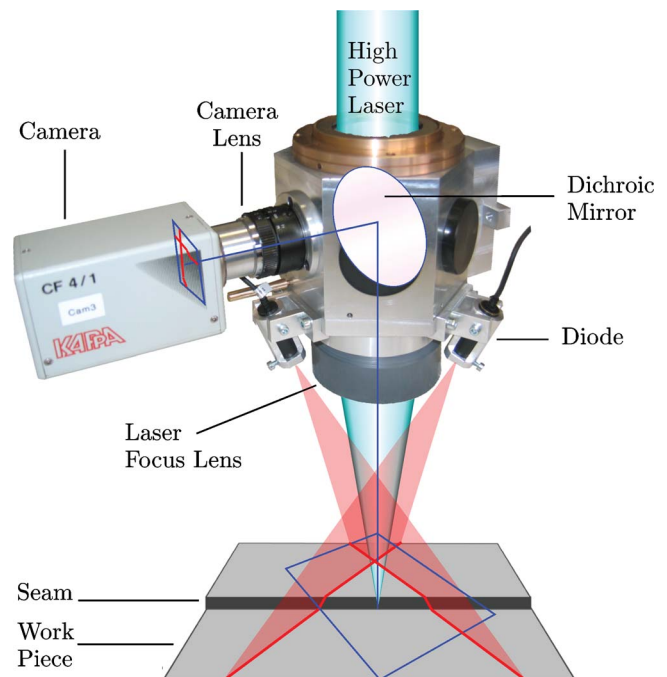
Mock-up of the integrated laser welding head prototype.
